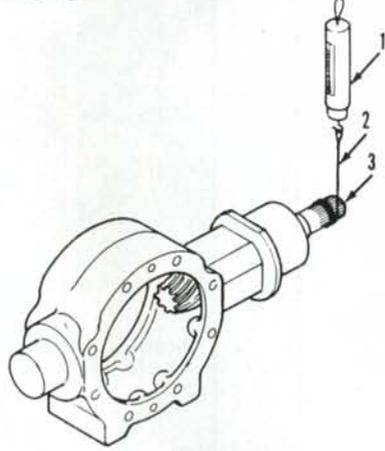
Wrap a cord (2) around pinion shaft (3) and use a spring scale (1) to check pinion rolling torque. Refer to text for adjustment.
